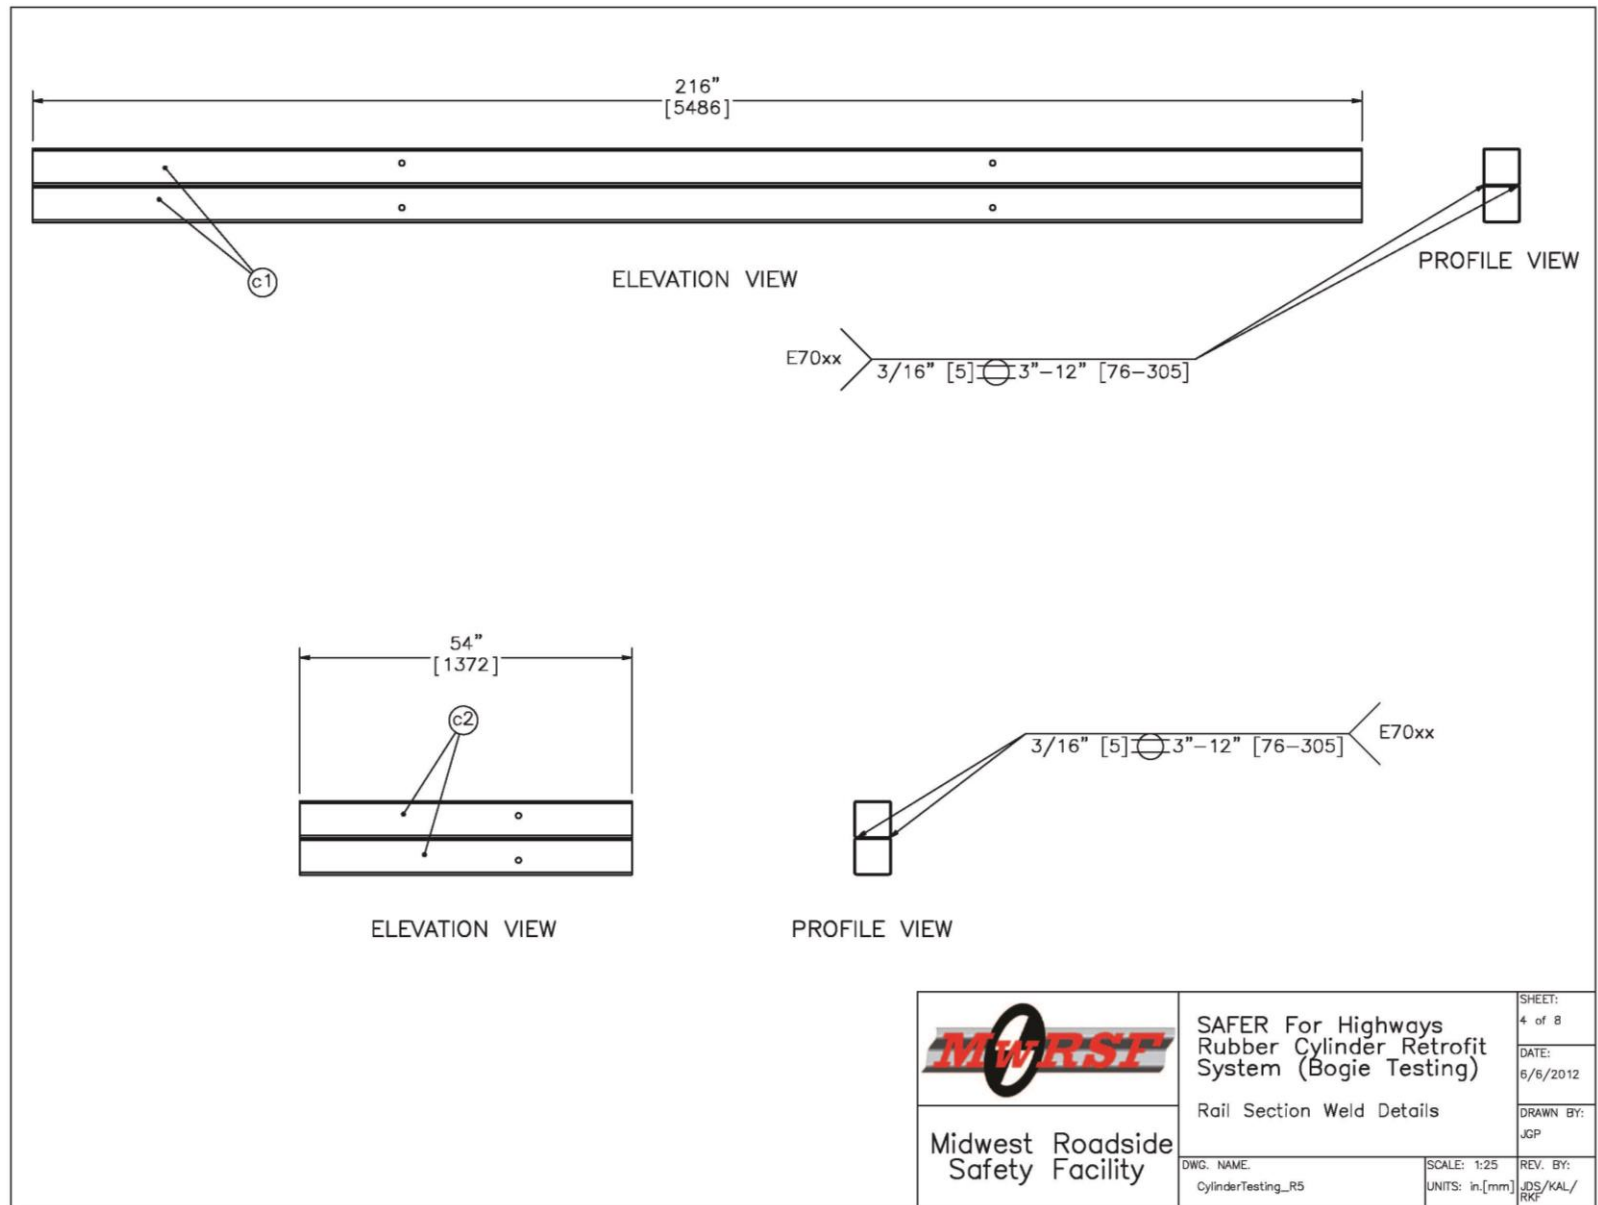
Rail Section Weld Details, Test No. SFHC-1
